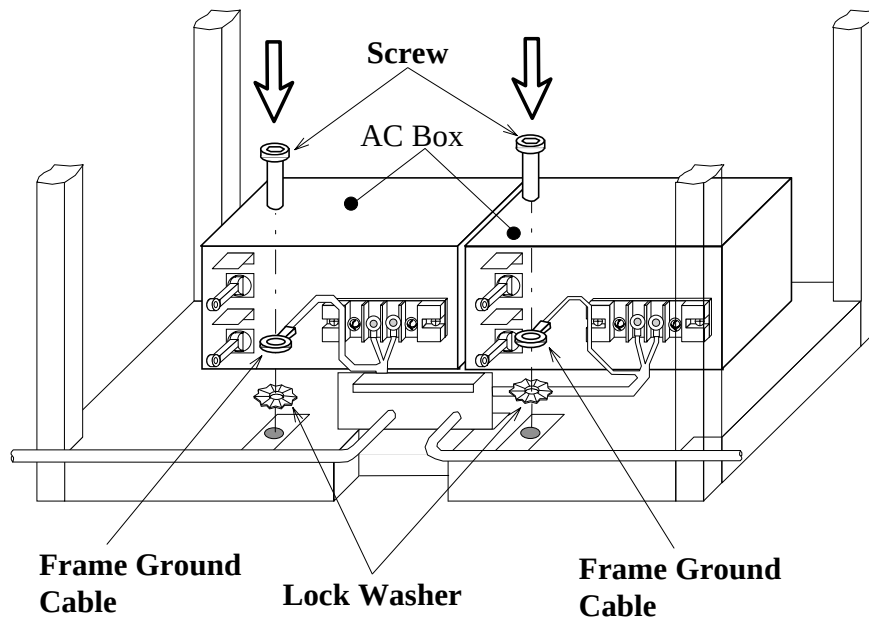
Attachment of Frame Ground Cable
